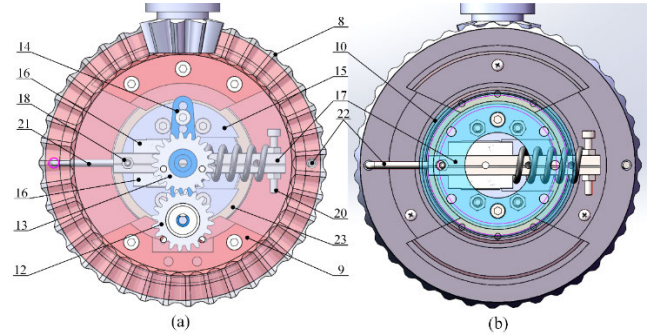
Schematic diagram of the main rotating module: (a) Backward view; (b) Forward view; 8-bevel gear, 12-driving gear, 13-driven gear, 14-transmission beam, 15-stiffness adjustment frames, 16-slider, 17-guide rail, 18-guide rail limit bolt, 20-spring limit bolt, 21-22: ropes, 23-small bearing.
